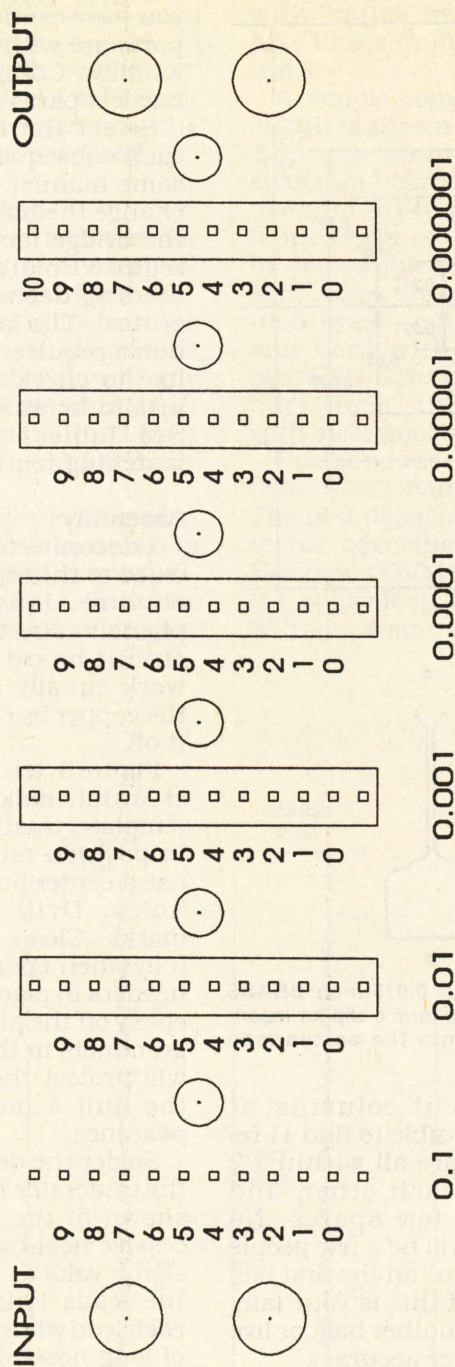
THE KVD FRONT PANEL makes a handy drilling guide. It is shown full-size here.
